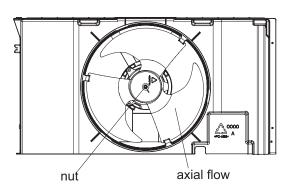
4. Remove outdoor fan shroud. See Figure 525.
